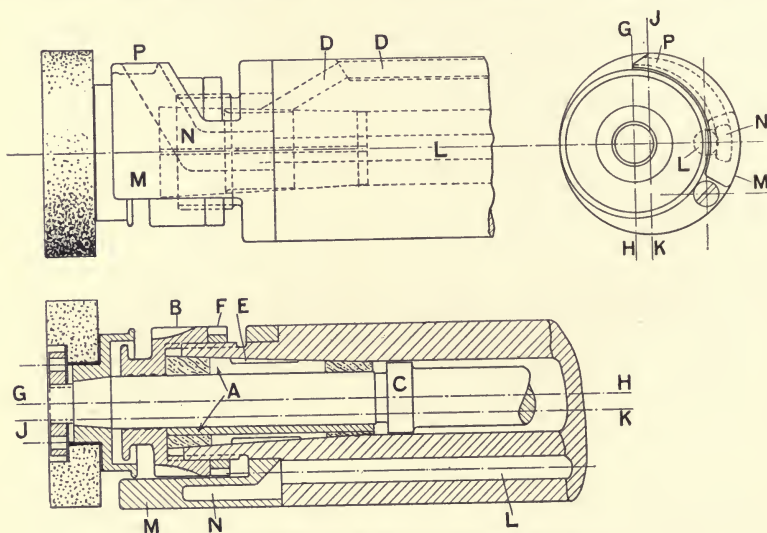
GUEST INTERNAL GRINDING SPINDLE
